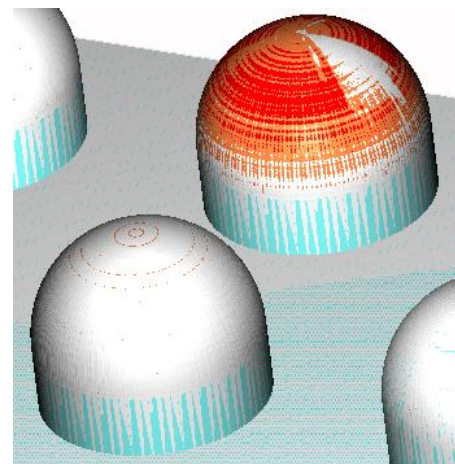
Comparison of the machined surfaces made by Radial strategy - bottom 3-axis, top 5-axis milling
